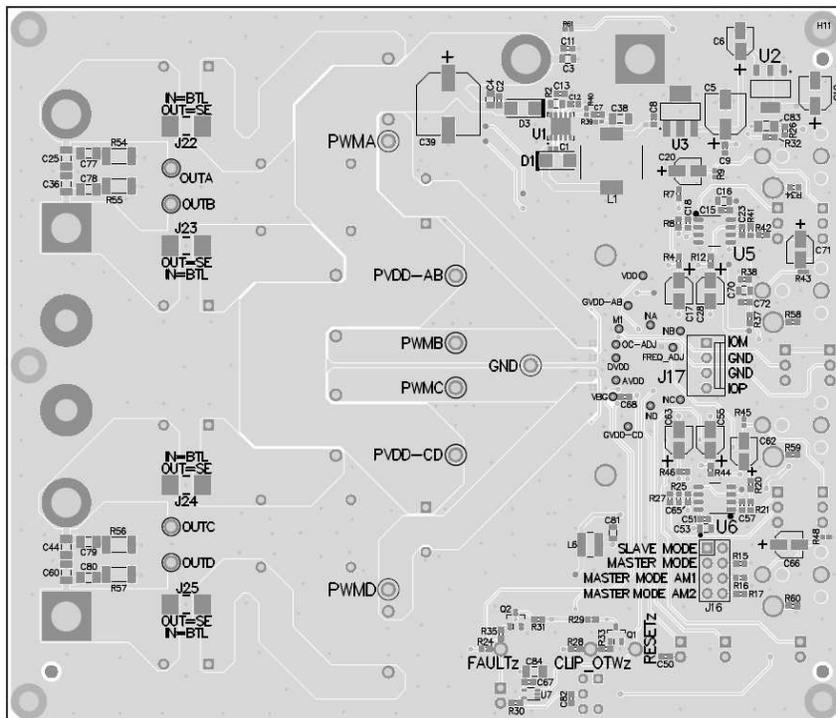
TPA3251D2EVM Bottom Composite Assembly
